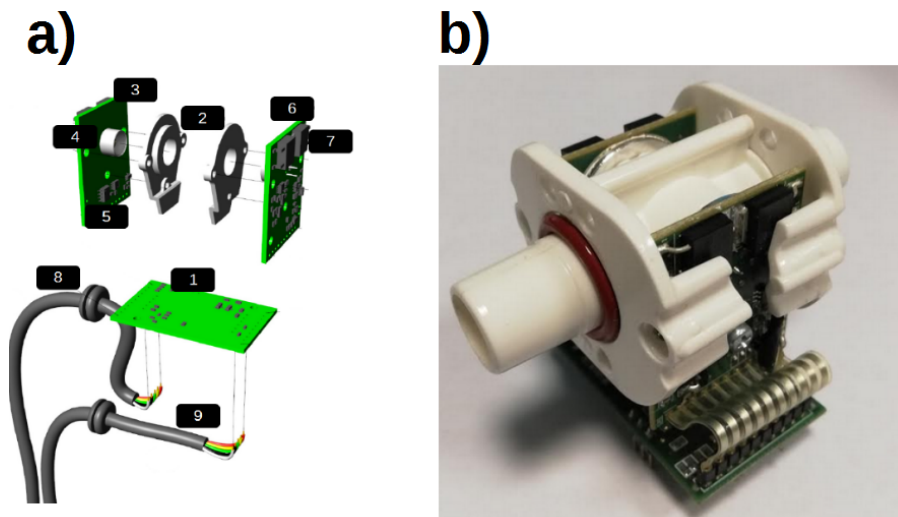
(a) Exploded drawing of the CO<sub>2</sub> sensor: (1) CPU board; (2) aluminum rings; (3) emitter board; (4) InAsSb/InAs element; (5) digital temperature sensor; (6) receiver board; (7) heating resistances; (8) Flow sensor communication cable; (9) power supply/RS-485 cable. (b) Assembly of the developed CO<sub>2</sub> and plastic cuvette.
